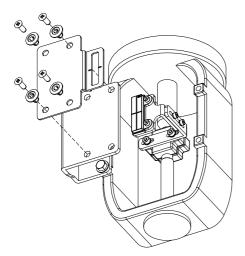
Assembly of Positioner Mounting Bracket and Alignment Template
